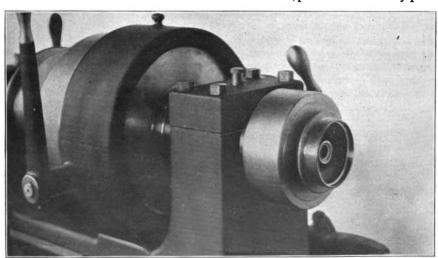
SHOWING THE VALVE BONNET IN THE CHUCK.
